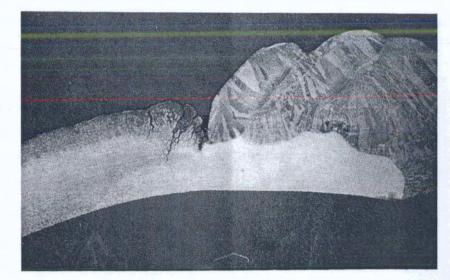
Photomacrograph of weldment cross section from type 309 annealing inner cover welded with type 309 rod. Etchant, Marble's Reagent. Magnification 5X.
